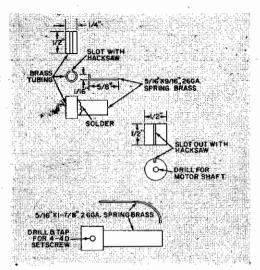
Contacts are made from strips of spring metal soldered to short lengths of tubing. Drill the rotating contact to fit snugly on the motor shaft.
